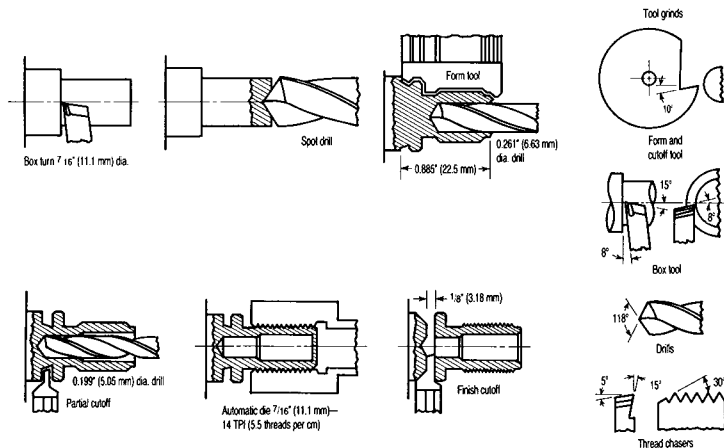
Tools used in automatic screw machining of 5/16-in. (16 mm) diameter MONEL alloy R-405. (See Table 18, Test 1.)
